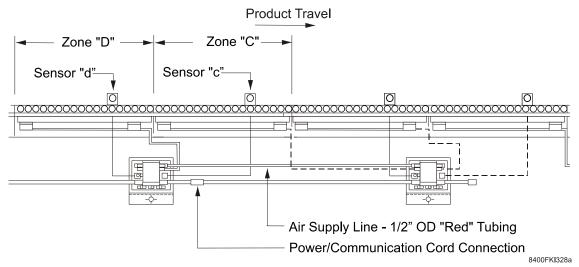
Mount the Photo-Eye/Bracket Assembly
